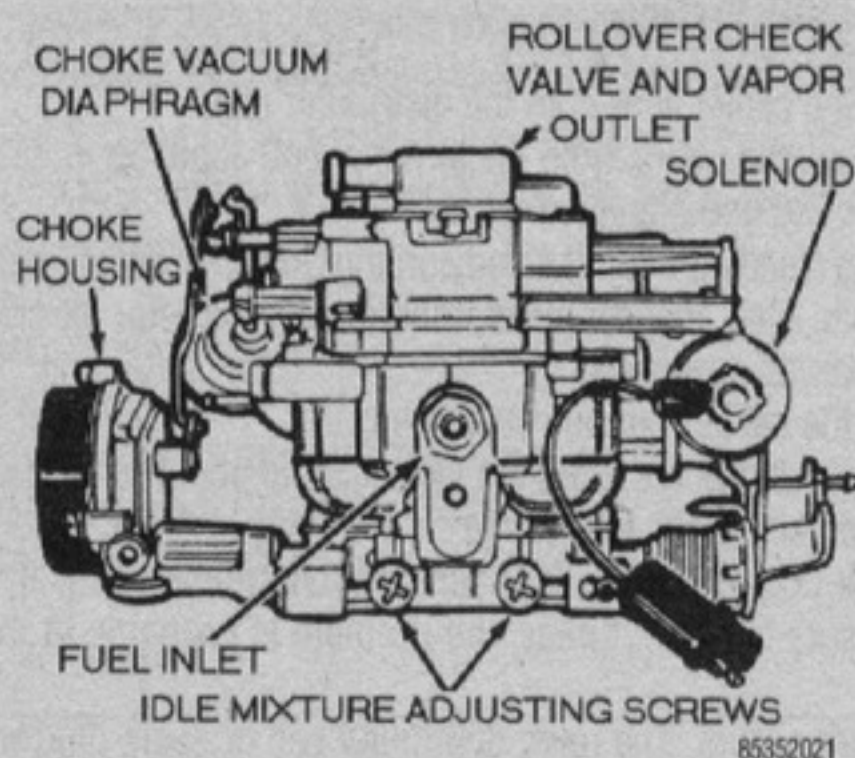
BBD 2-bbl carburetor—4.2L engine
